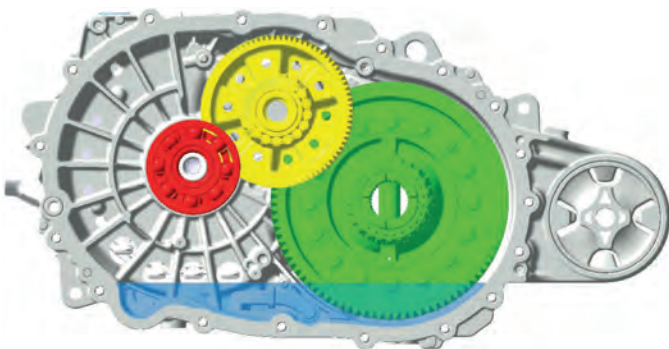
Cross section view of SPD showing the intermediate-gear-on-top structure
